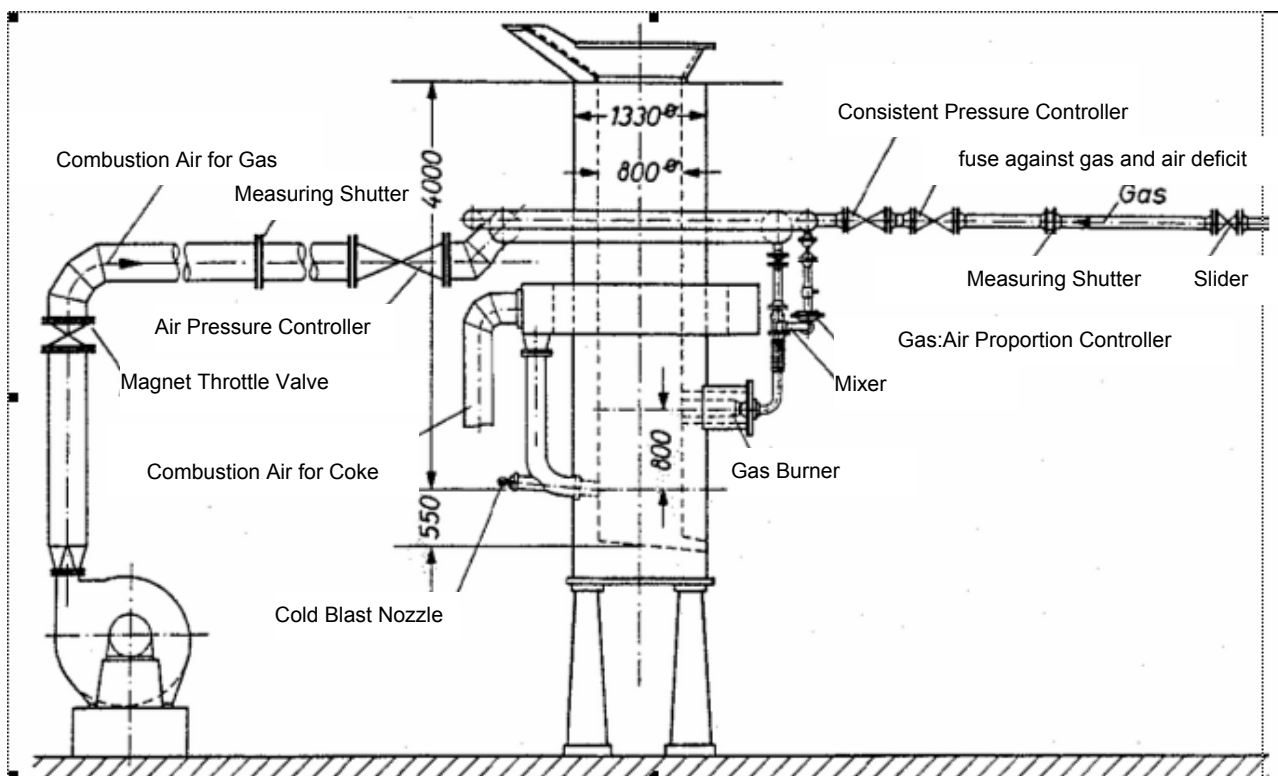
> Cold Blast Cupola with Air – Natural Gas Burners [2].
